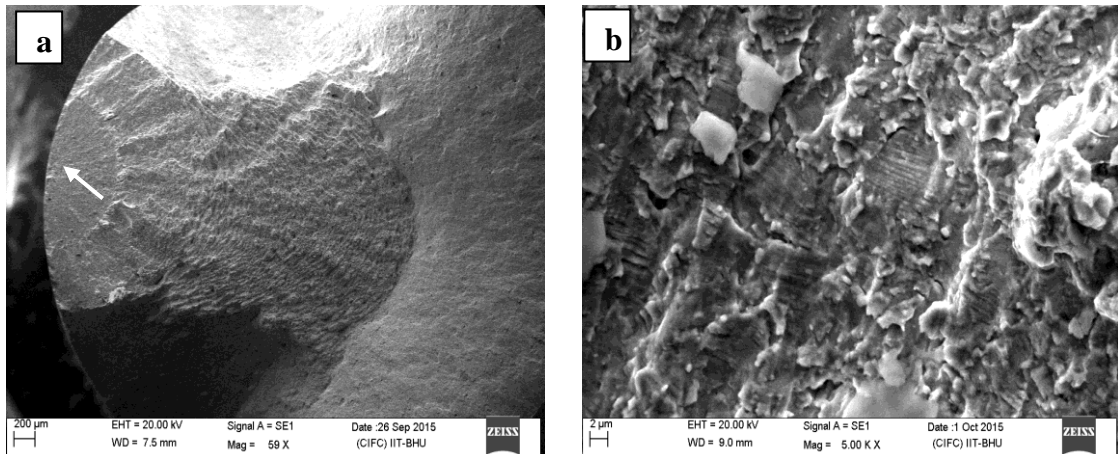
8: Fractographs of the sample fractured at the mean stress of 900 MPa ($R = 0.7$) at 600°C showing: (a) the fracture surface and crack initiation sites, (b) mixed mode of fracture with fatigue striations and dimples.
